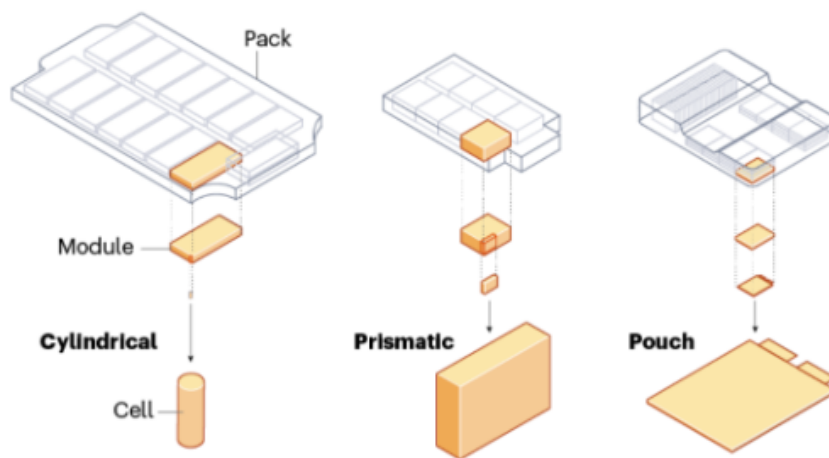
Arrangement of battery cells into modules and assembly into battery packs [8]
